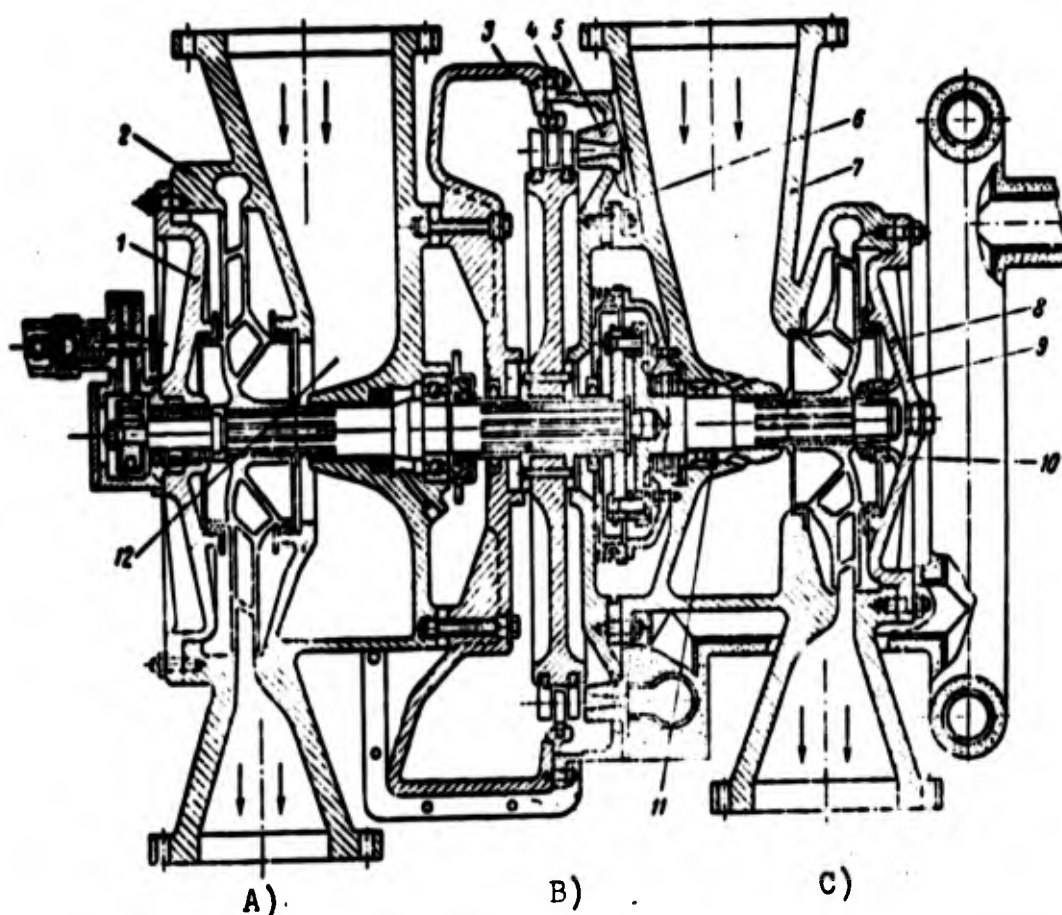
Turbopump assembly with four-support rotor: A) fuel pump; B) turbine; C) oxidizer pump; 1, 8 - covers of pump housings; 2, 7 - pump housings; 3, 4 - turbine housings; 5 - nozzle; 6 - blocks; 9 - thrust bearing bushing with radial ducts; 10, 11 - plain bearings; 12 - duct baffle.
